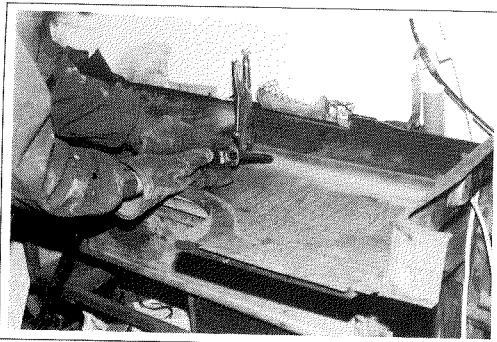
Just a little cheat for the camera to show the wing top clamped into position and me pretending to plug weld it on having already completed the job earlier sans said camera. Make a few well spaced welds first to ensure the correct positioning of the panel and then work your way along in between. For a good tight join, always weld close to a clamp. Finish off with seam sealer and paint.
